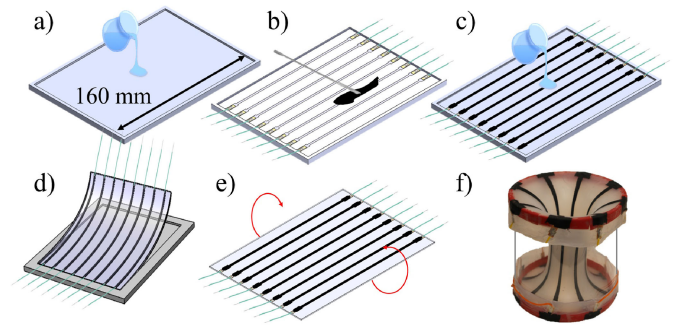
Fabrication of the encapsulating sensor. (a) 25 g of Ecoflex 00-10 is poured into a rectangular mold to form a 1 mm thickness. (b) After the silicone has set, we laser cut a stencil with sensor patterns and place it on top of the silicone. The Carbon composite is spread across the laser cut mask and over the electrodes. (c) The mask is peeled off and a second layer of 25 g of Ecoflex 00-10 is poured. (d) The membrane is peeled off from its mold. (e) The membrane is folded along its long axis and 1 g of Ecoflex 00-10 is applied to join the two edges. (f) The encapsulating sensor is made by wrapping the edges around a Plexiglass cylinder and attaching a tube for actuation. The gripper is resting at ambient pressure.
